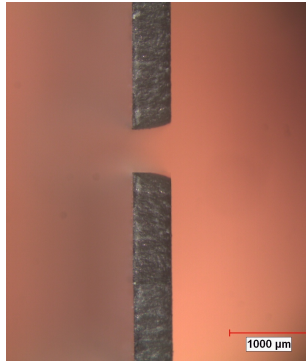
An enlargement of the detail machined only by water after the clogging of Alumina#220.
